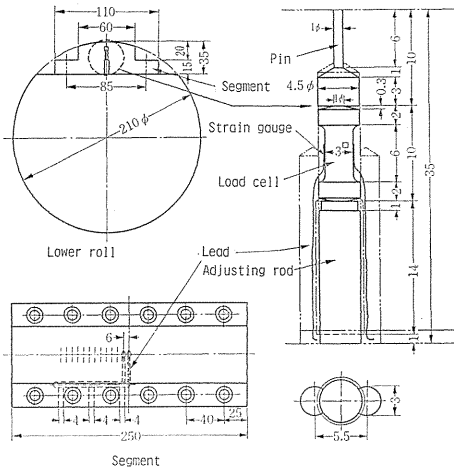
3 Details and assembly of the roll for measuring the pressure.
